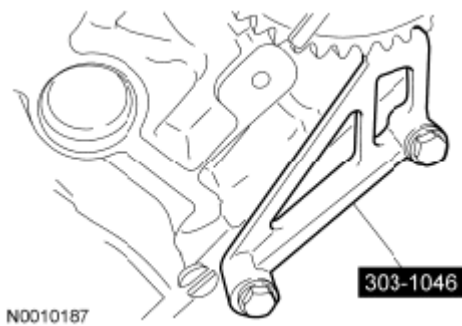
Identifying Cam Phaser Locking Tool (303-1046)
